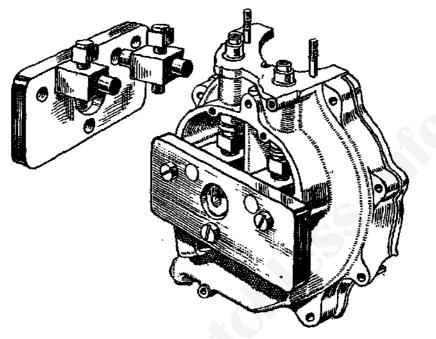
TAPPET-GUIDE REMOVING FIXTURE.
